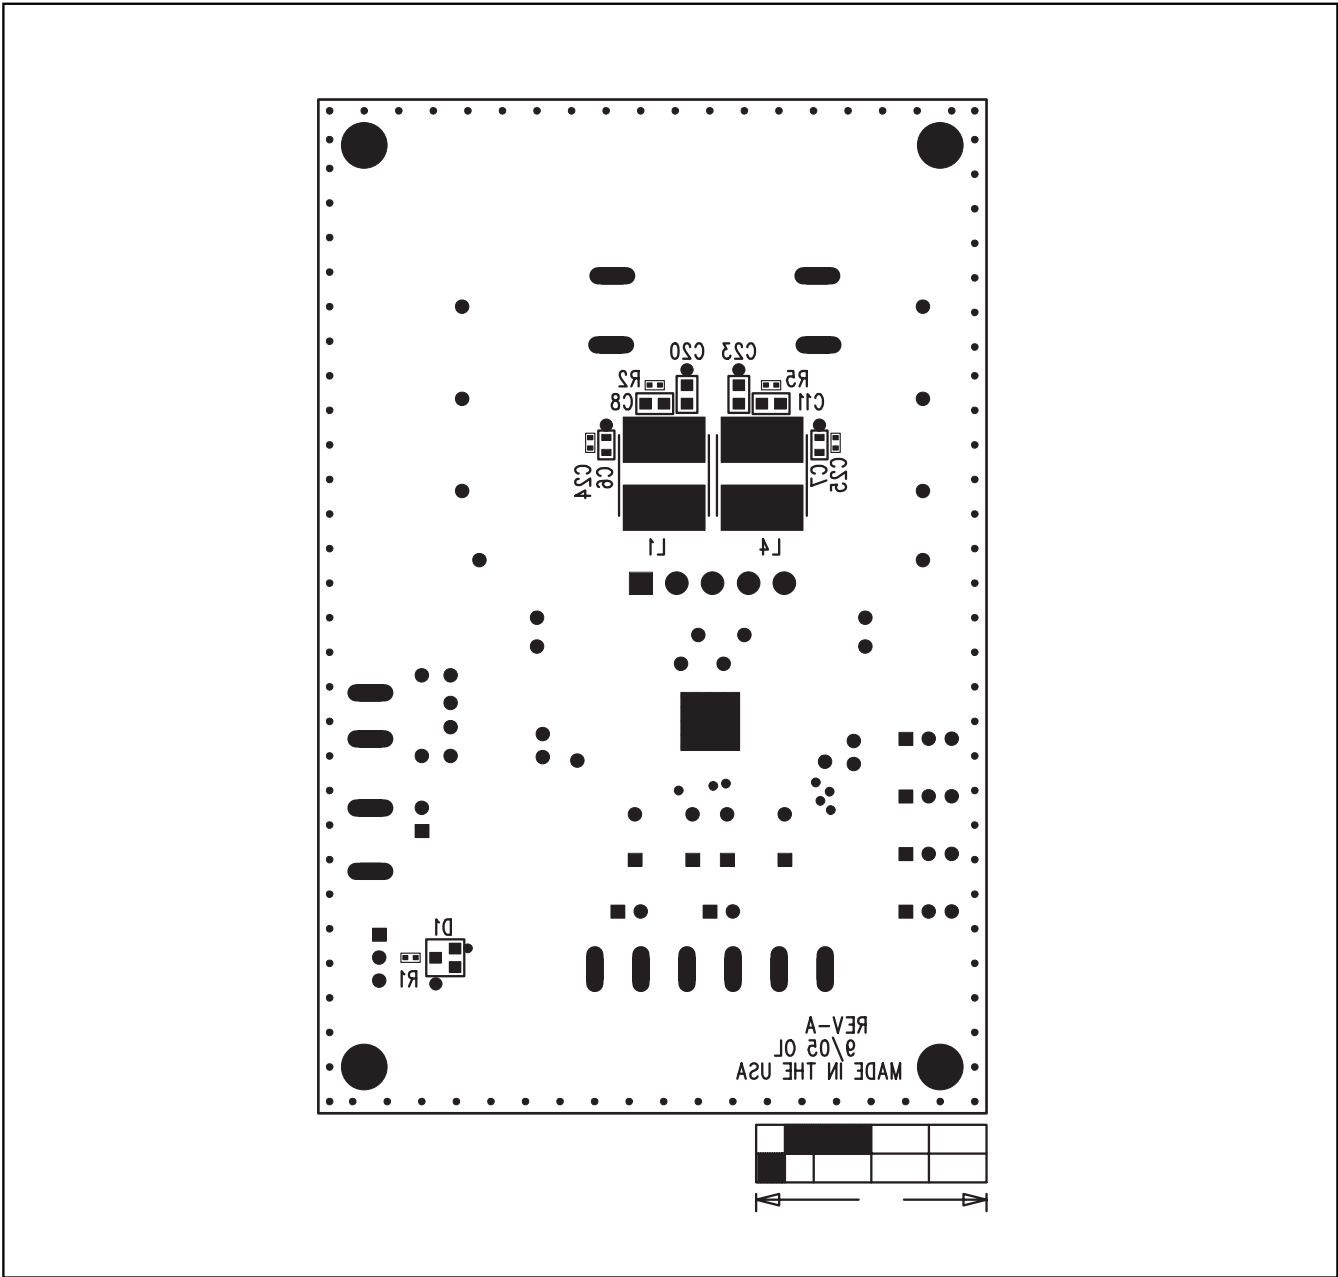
MAX9741 EV Kit Component Placement Guide—Solder Side
